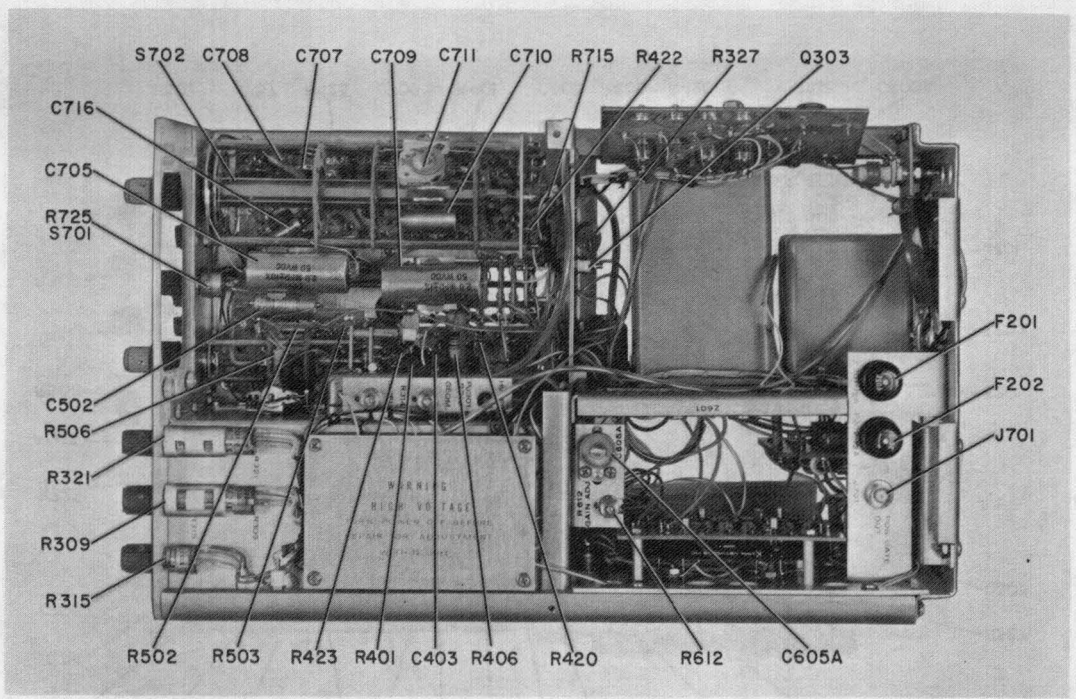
Oscilloscope AN/USM-117, only, Chassis Assembly,
